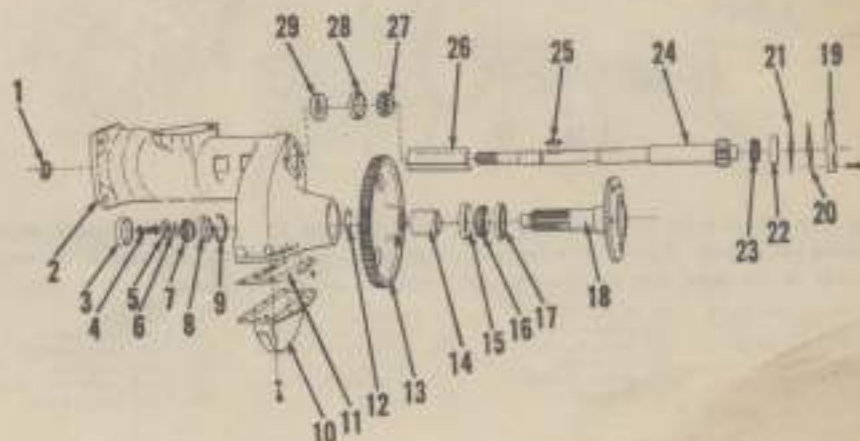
Exploded view of D-14 and D-15 final drive assembly.
